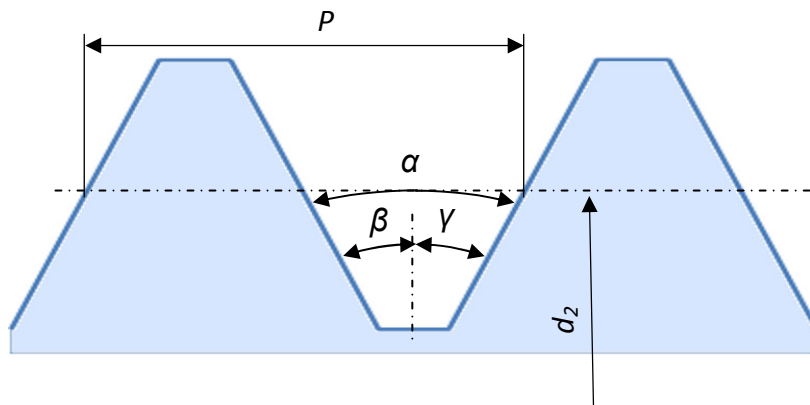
Elements of the parallel screw thread (drawing and symbols apply to external thread. For internal diameters, the capital symbol D applies)
